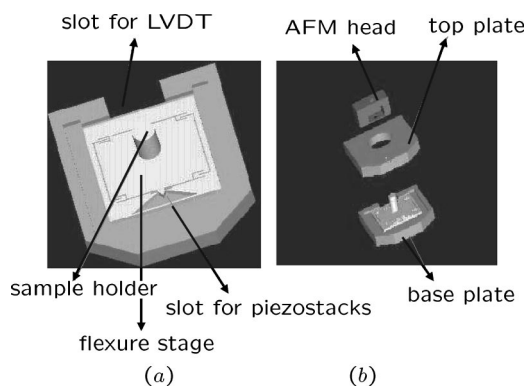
(a) Base plate of the flexure stage. (b) Exploded view of the flexure and evaluation stages.
